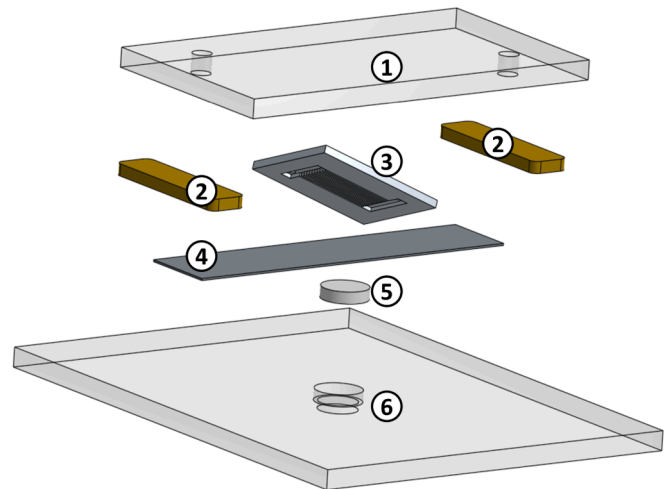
Simplified explosion view of the heat sink support system: (1) upper acrylic plate, (2) copper pieces, (3) heat sink, (4) steel sheet, (5) sapphire glass and (6) bottom acrylic plate.
